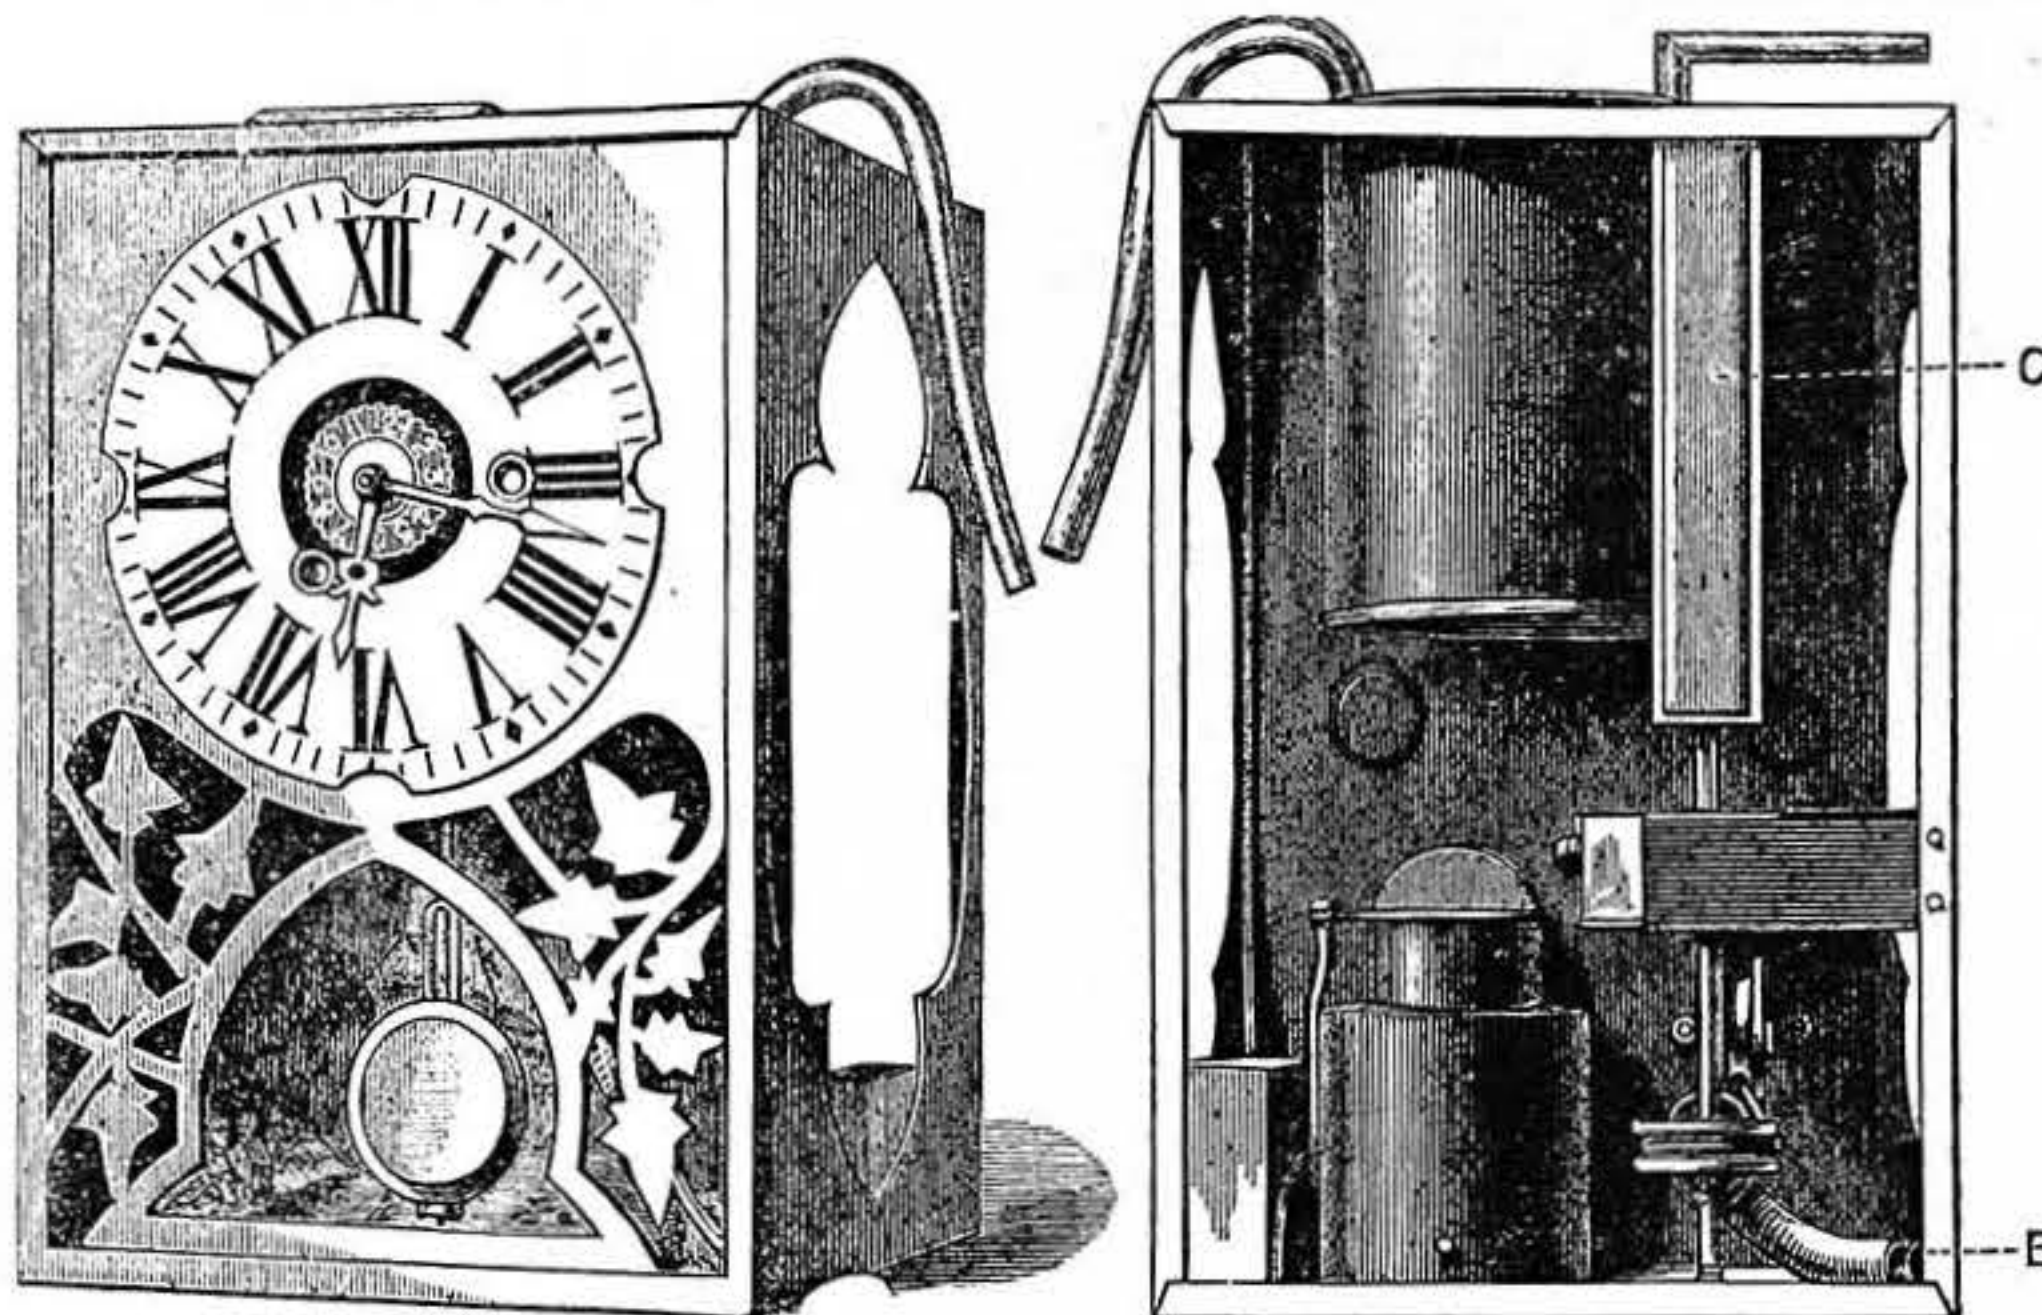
Apparatus complete. Fig. 2.—Back of ditto; B, Check Spring; C, Angle-piece.
